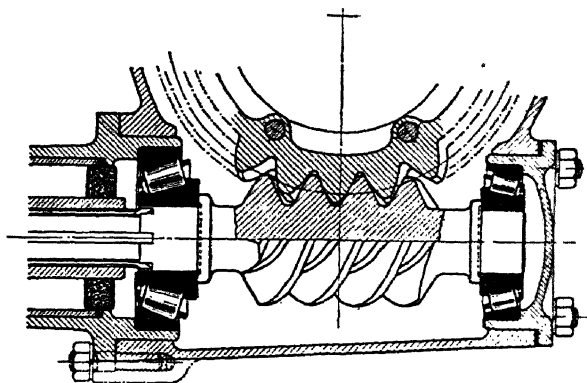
Underslung Worm Drive on Tapered Timken Roller Bearings.
